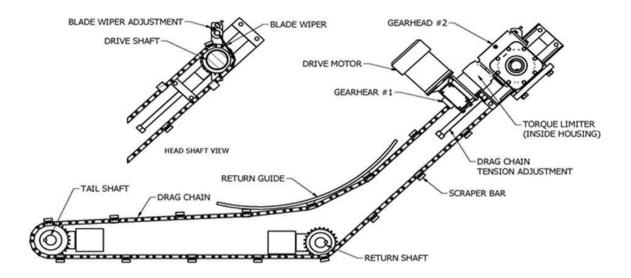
49: Sludge Scraper -- Diagram of Parts
